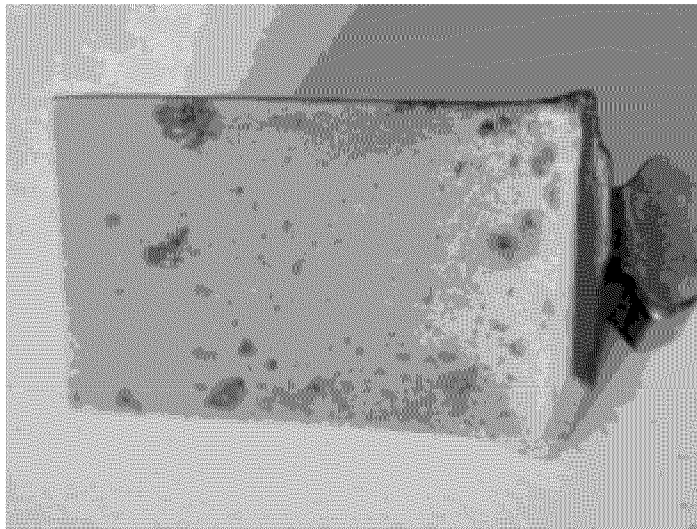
Pitting Corrosion on a HH-3F Compressor Blade
